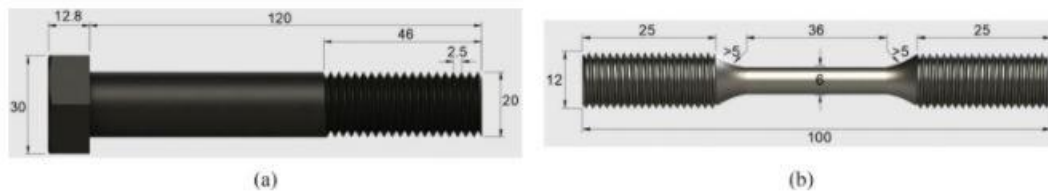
Bolt (a) and Coupon (b) dimensions [19]
